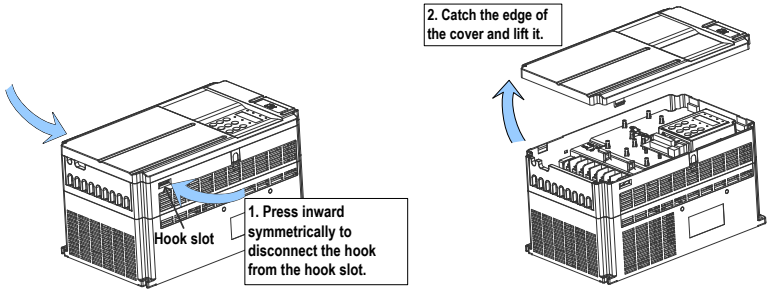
Removal of the front cover of IS580 sheet metal housing (IS580T080-R1-1 to IS580T210-R1-1)
